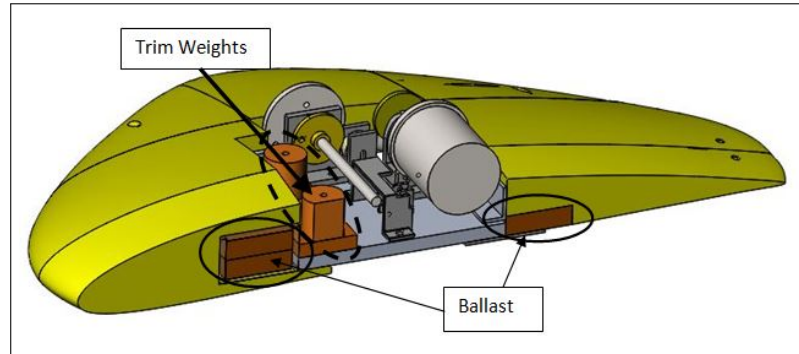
Cutaway view showing mount locations for ballast and trim weights
